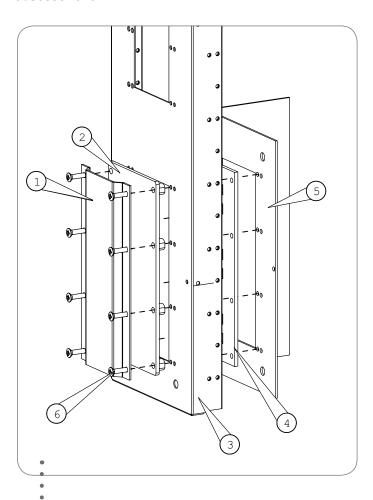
Installing insulator component assembly to frame plate at busbar end. Just an insulating flange is installed to frame plates not at busbar end.
